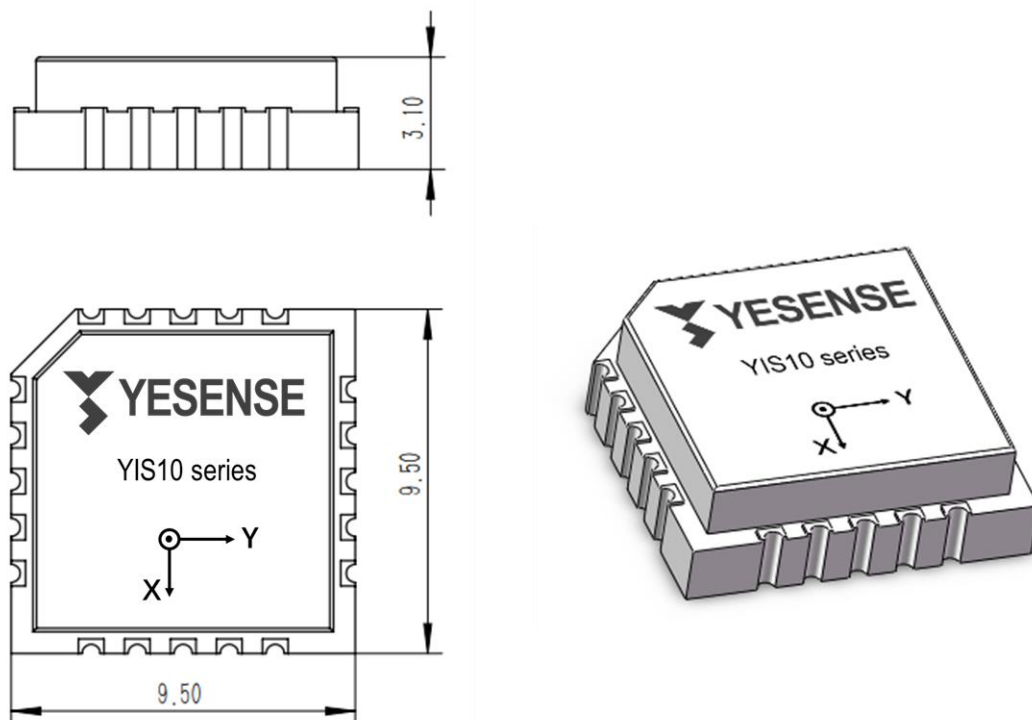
Package drawing (general tolerances are +/- 0.1 mm)
